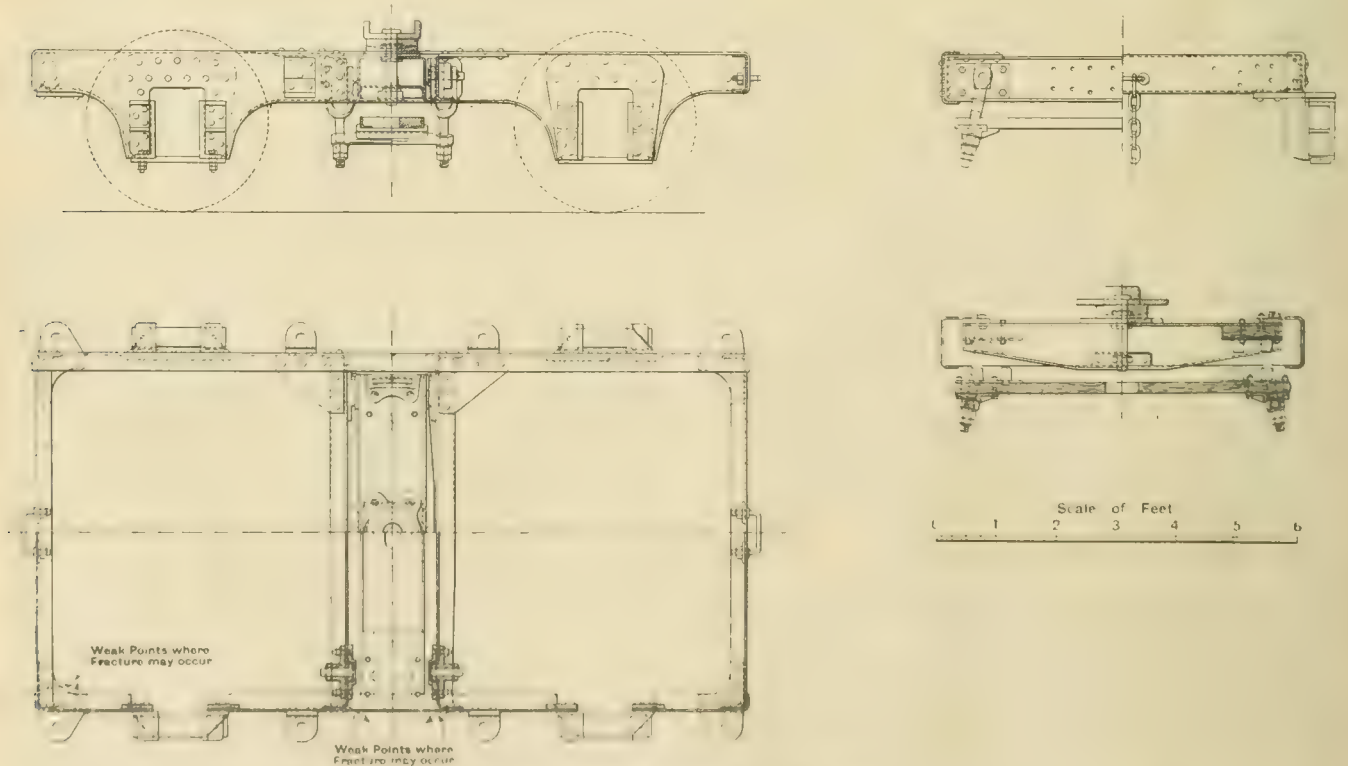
DETAILS OF PRESSED STEEL TRUCK.
